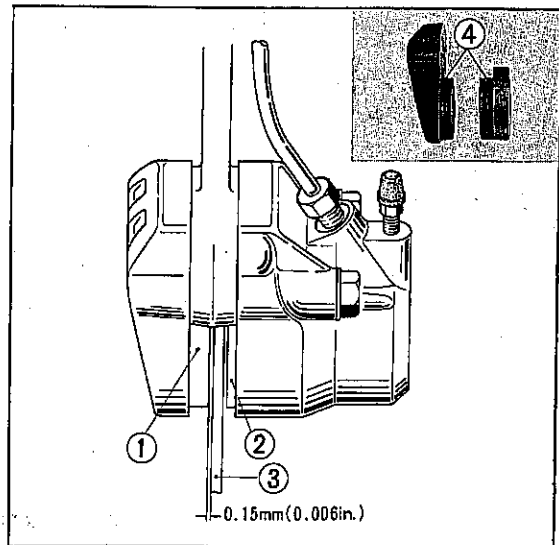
① Pad B ② Pad A ③ Brake disc ④ Wear limit indicator
